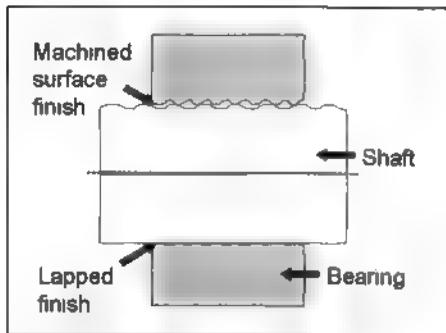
A magnified view of a shaft in a bearing showing the difference between a machined and a lapped finish.
